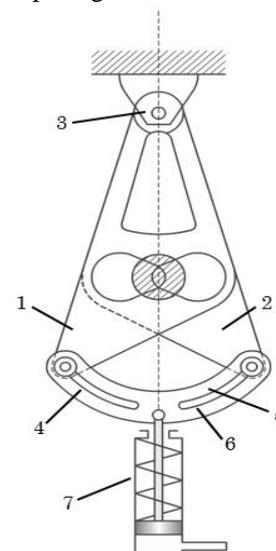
Schematic view of the control valve: 1, 2 – plates, 3 – axle, 4, 5 – guides, 6 – cam, 7 – linear drive.
